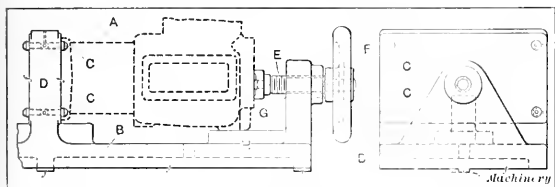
Detail of Reciprocal Milling Jig shown in Fig. 6
